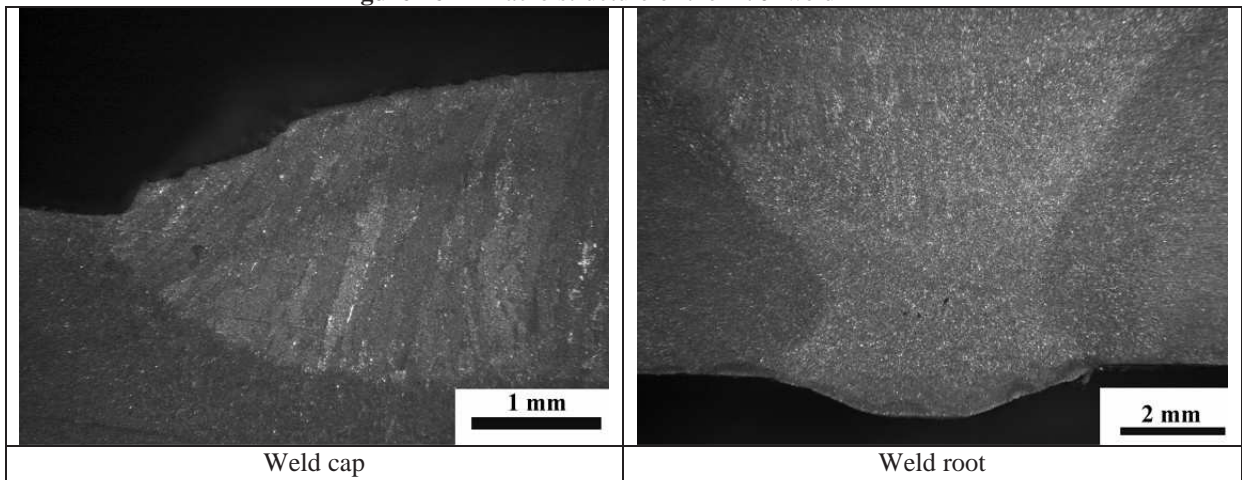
X70 FCAW - Macro of the weld cap and root
